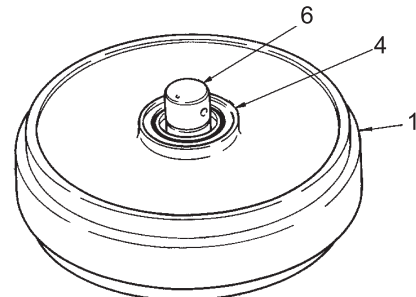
Inserting idler (1) and installing floating seal (4)
